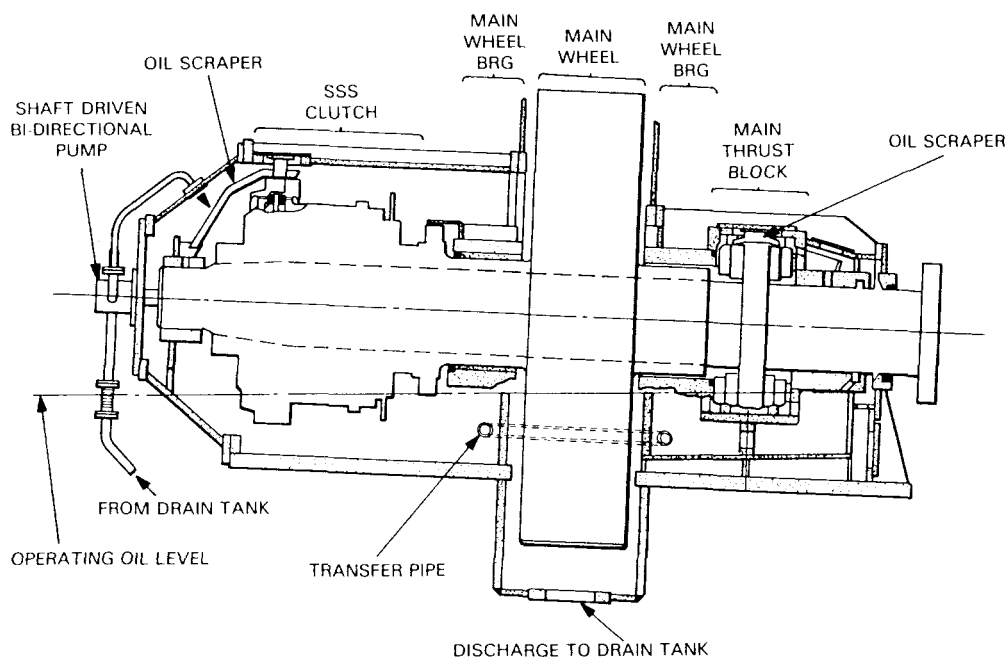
LUBRICATION SYSTEM FOR MOTOR DRIVE
